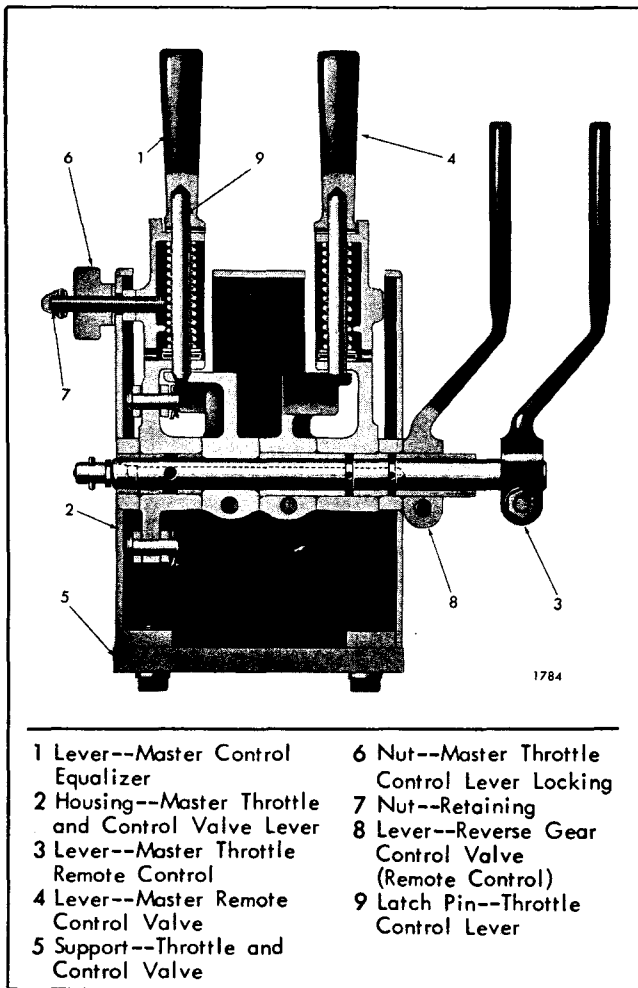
Master Throttle Assembly on a Tandem Twin Unit
